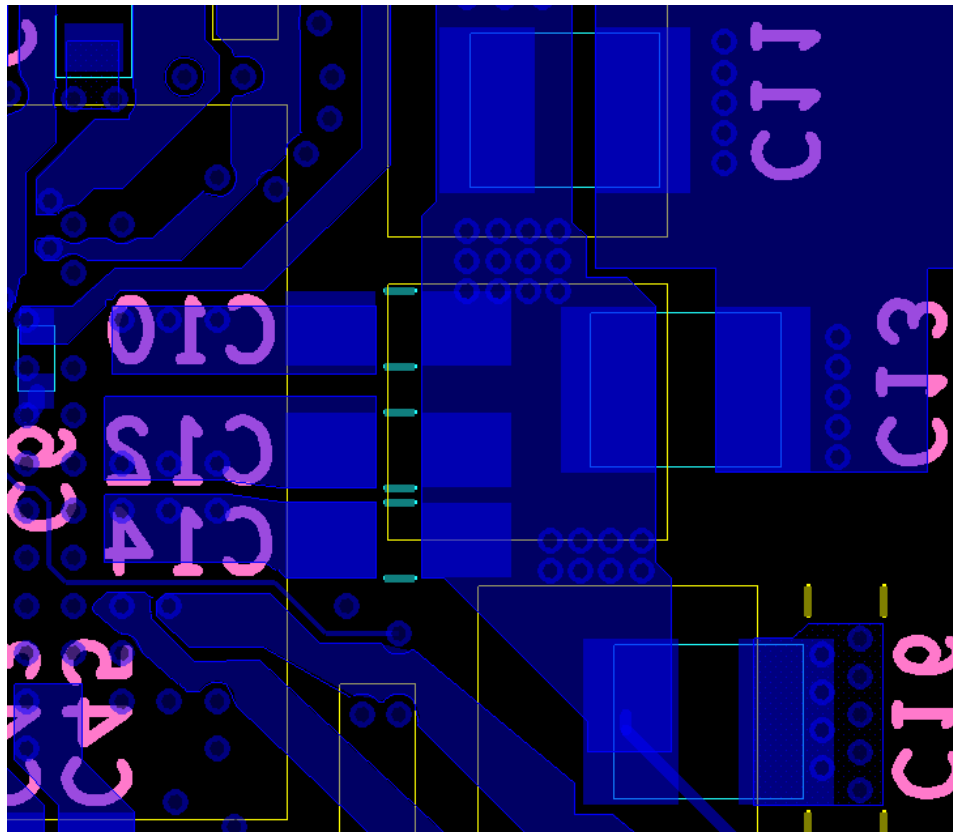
Bottom Layer Zoomed View of SMPS123 Input and Output Capacitor Layout
